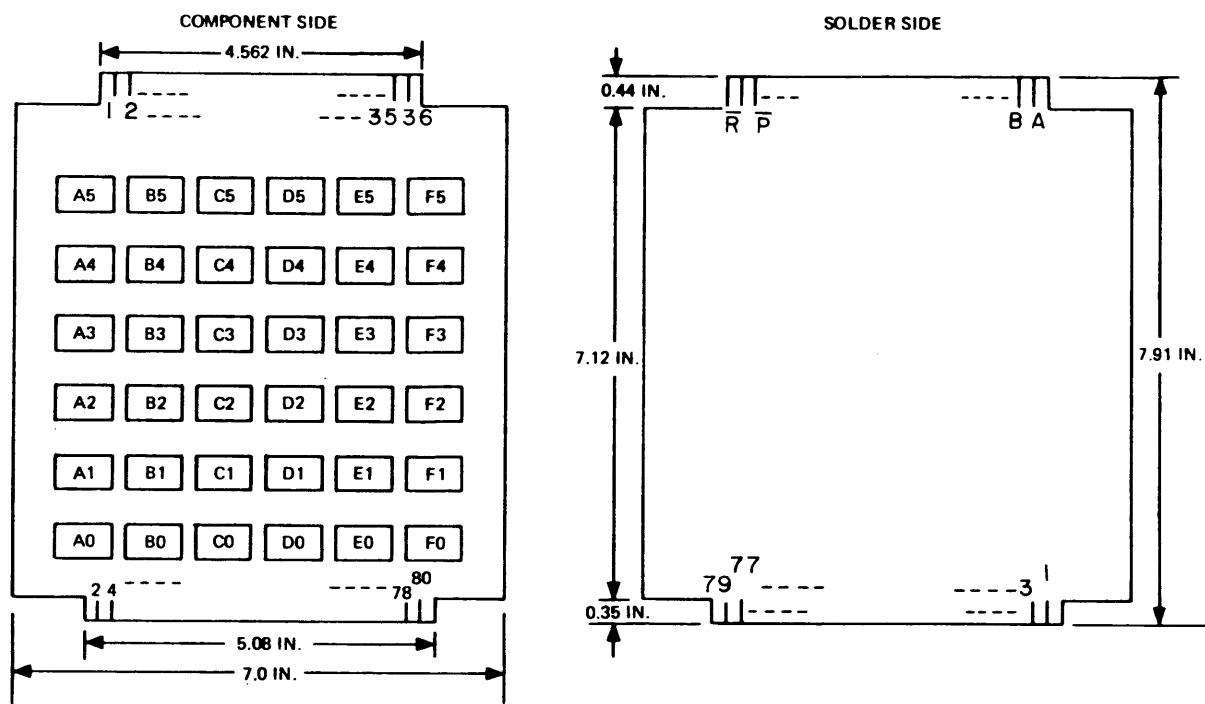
Single Connector Type 1 Printed Circuit Board,
